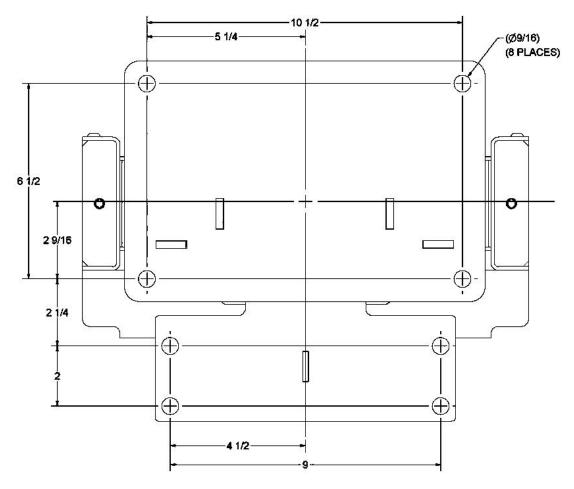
Night Scan Vertical HDT Saddle Mounting Holes
